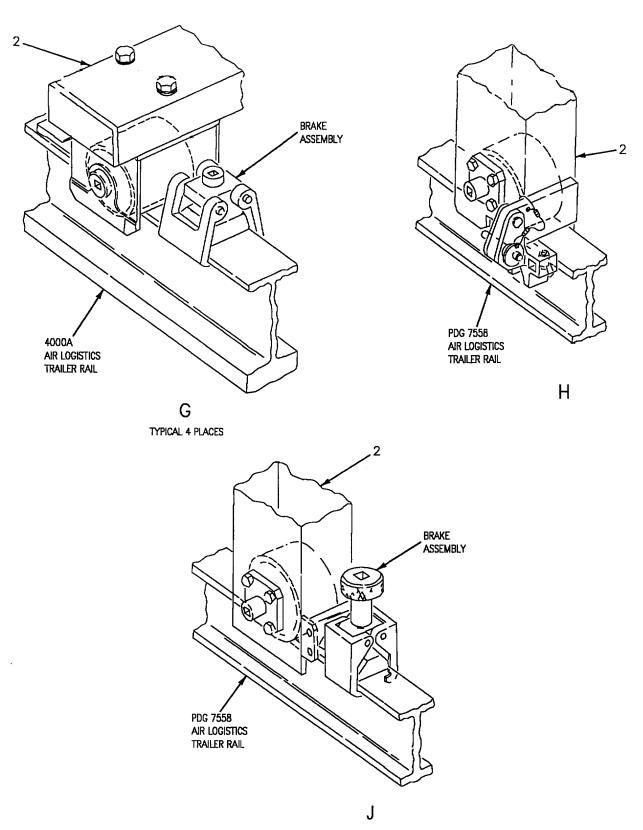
Inner Wing Removal and Installation Adapter (Sheet 5)
